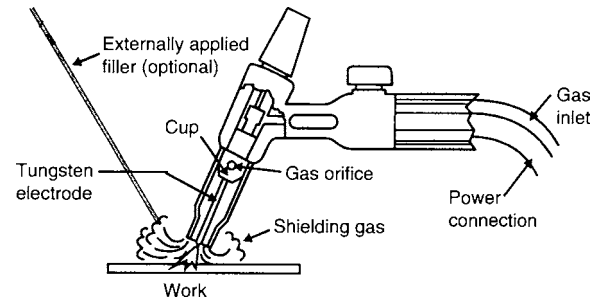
Gas tungsten arc welding (GTAW).
